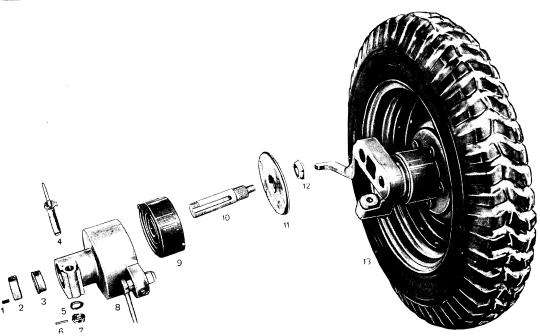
SPRING DEVICE WITH COIL SPRING — DISMANTLED (for weapons B1 and B1A1)
